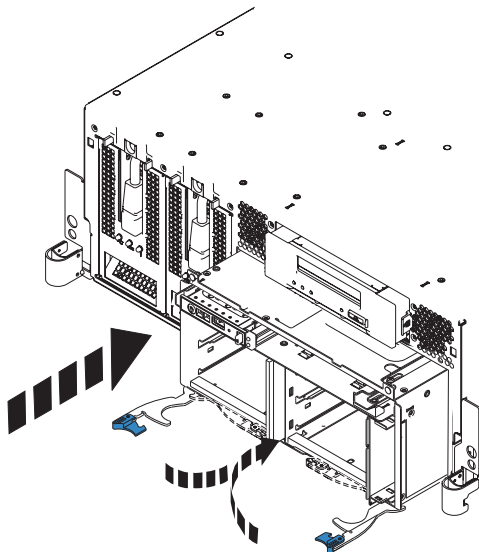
Installing the unpopulated disk drive backplane on a rack-mounted model
